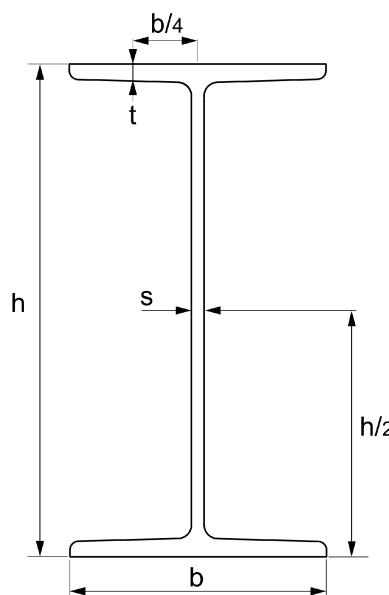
Taper flange I sections IPN, J and extra wide flange beams HLZ
